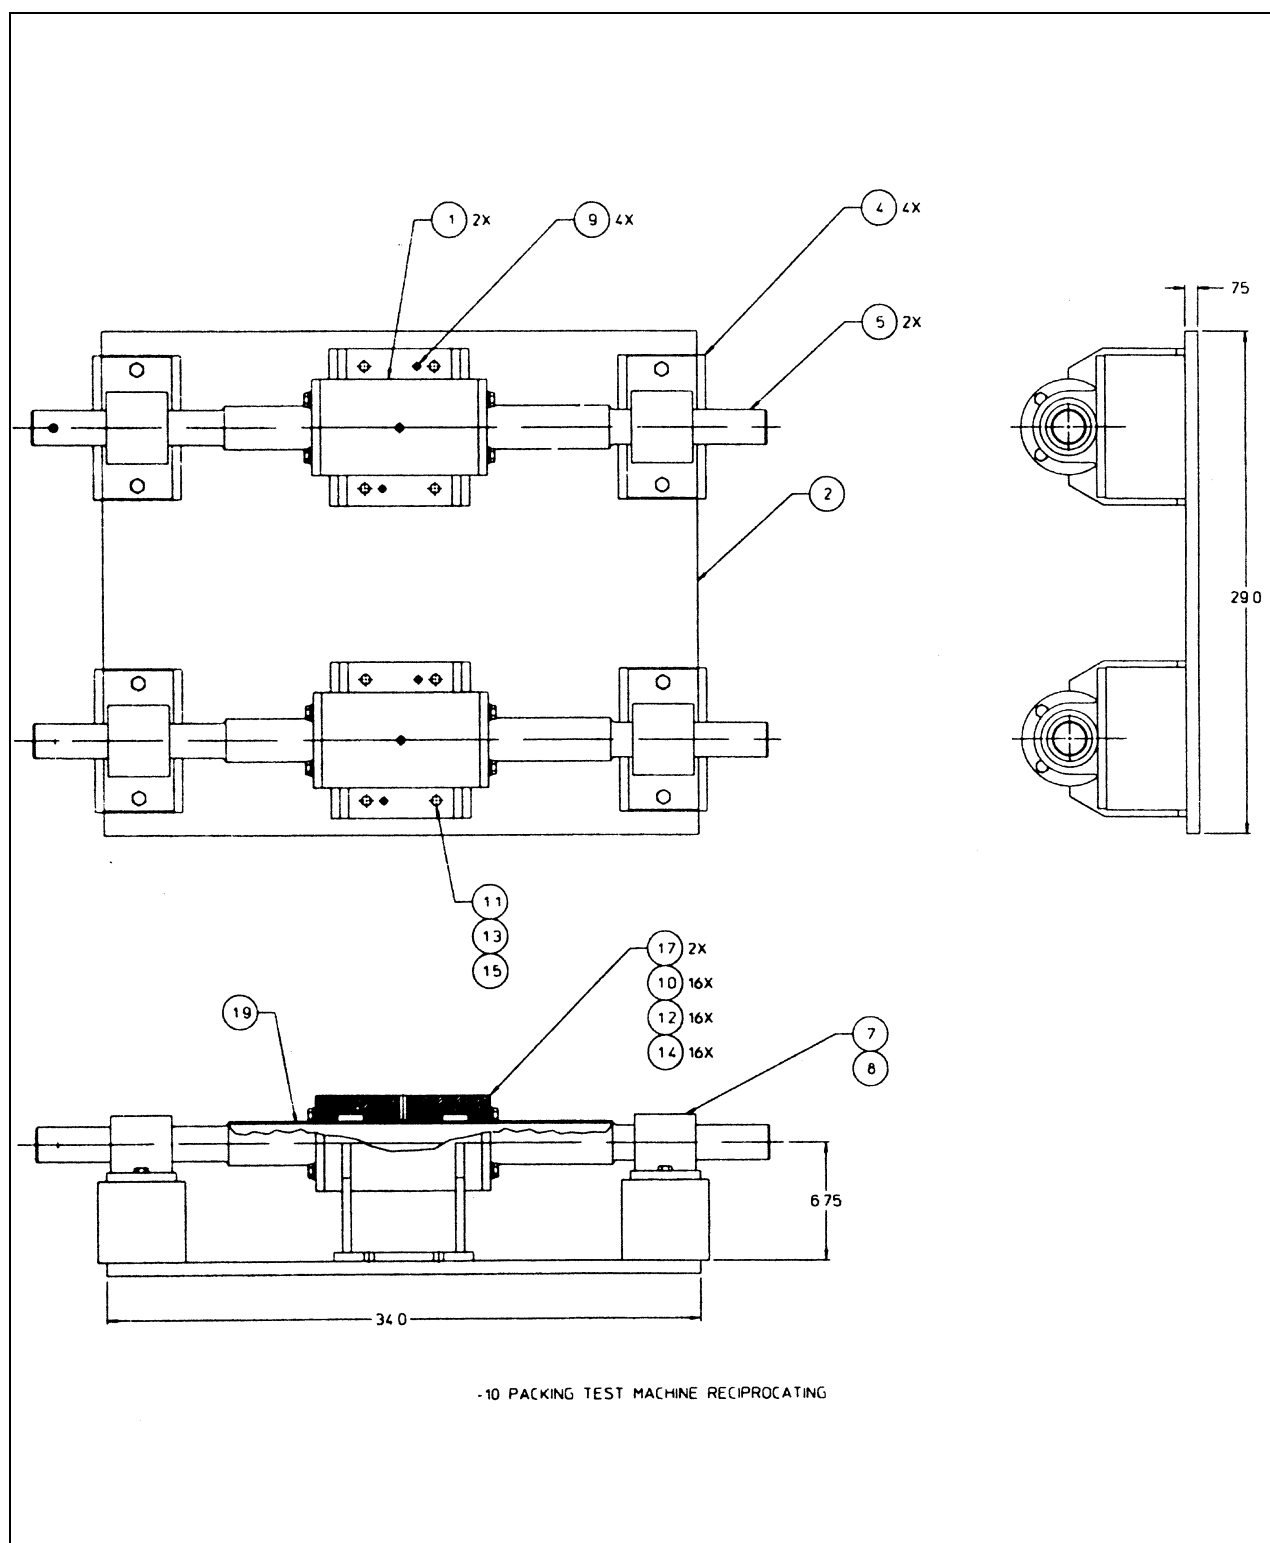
Reciprocating pump test device. (Sheet 1 of 3)
